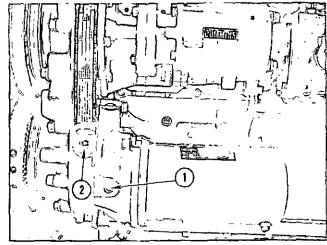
(N11963) Lubricating system priming point - inline engine
